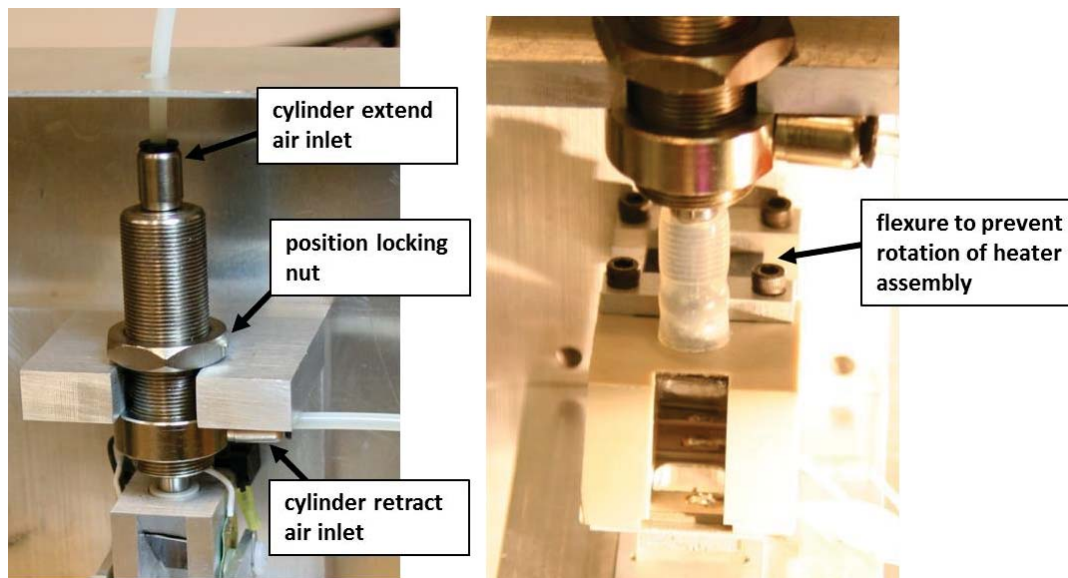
Prototype 1 pneumatic cylinder – 0.5" bore
